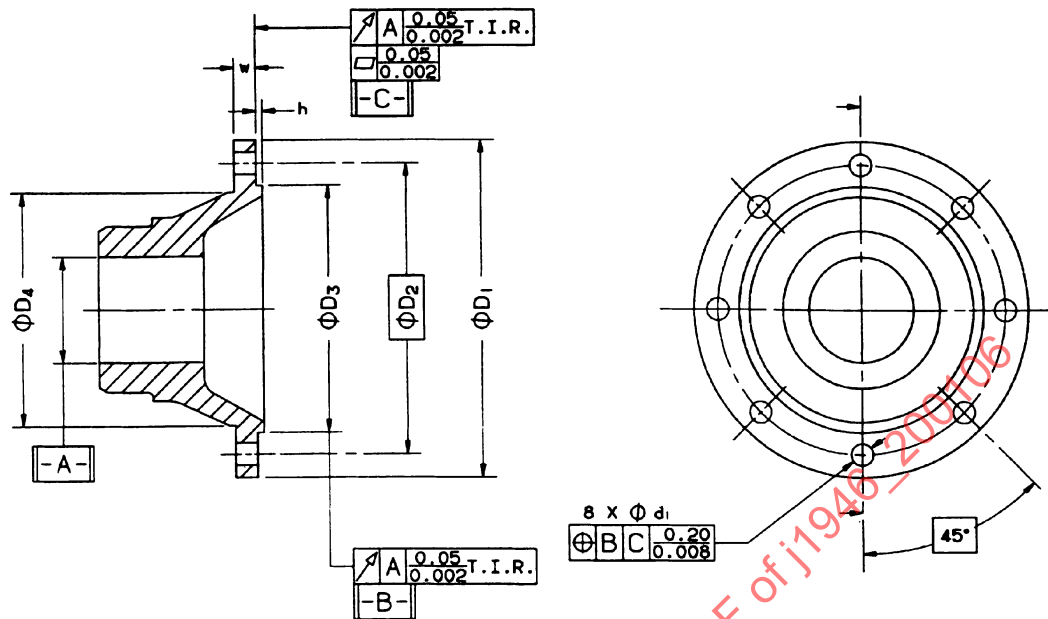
TYPE A COMPANION FLANGES—TRUE POSITION, FLATNESS AND RUNOUT TOLERANCES—mm/in
